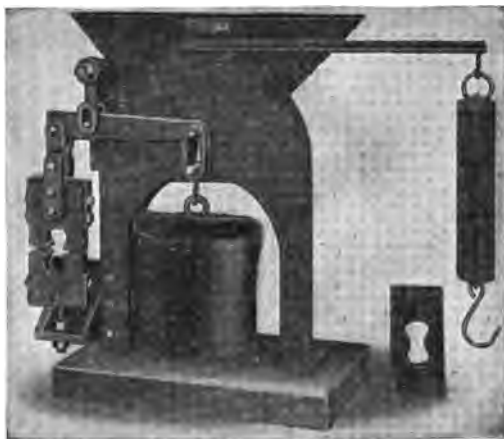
SEC. 10j.—The Wadsworth core testing machine.
